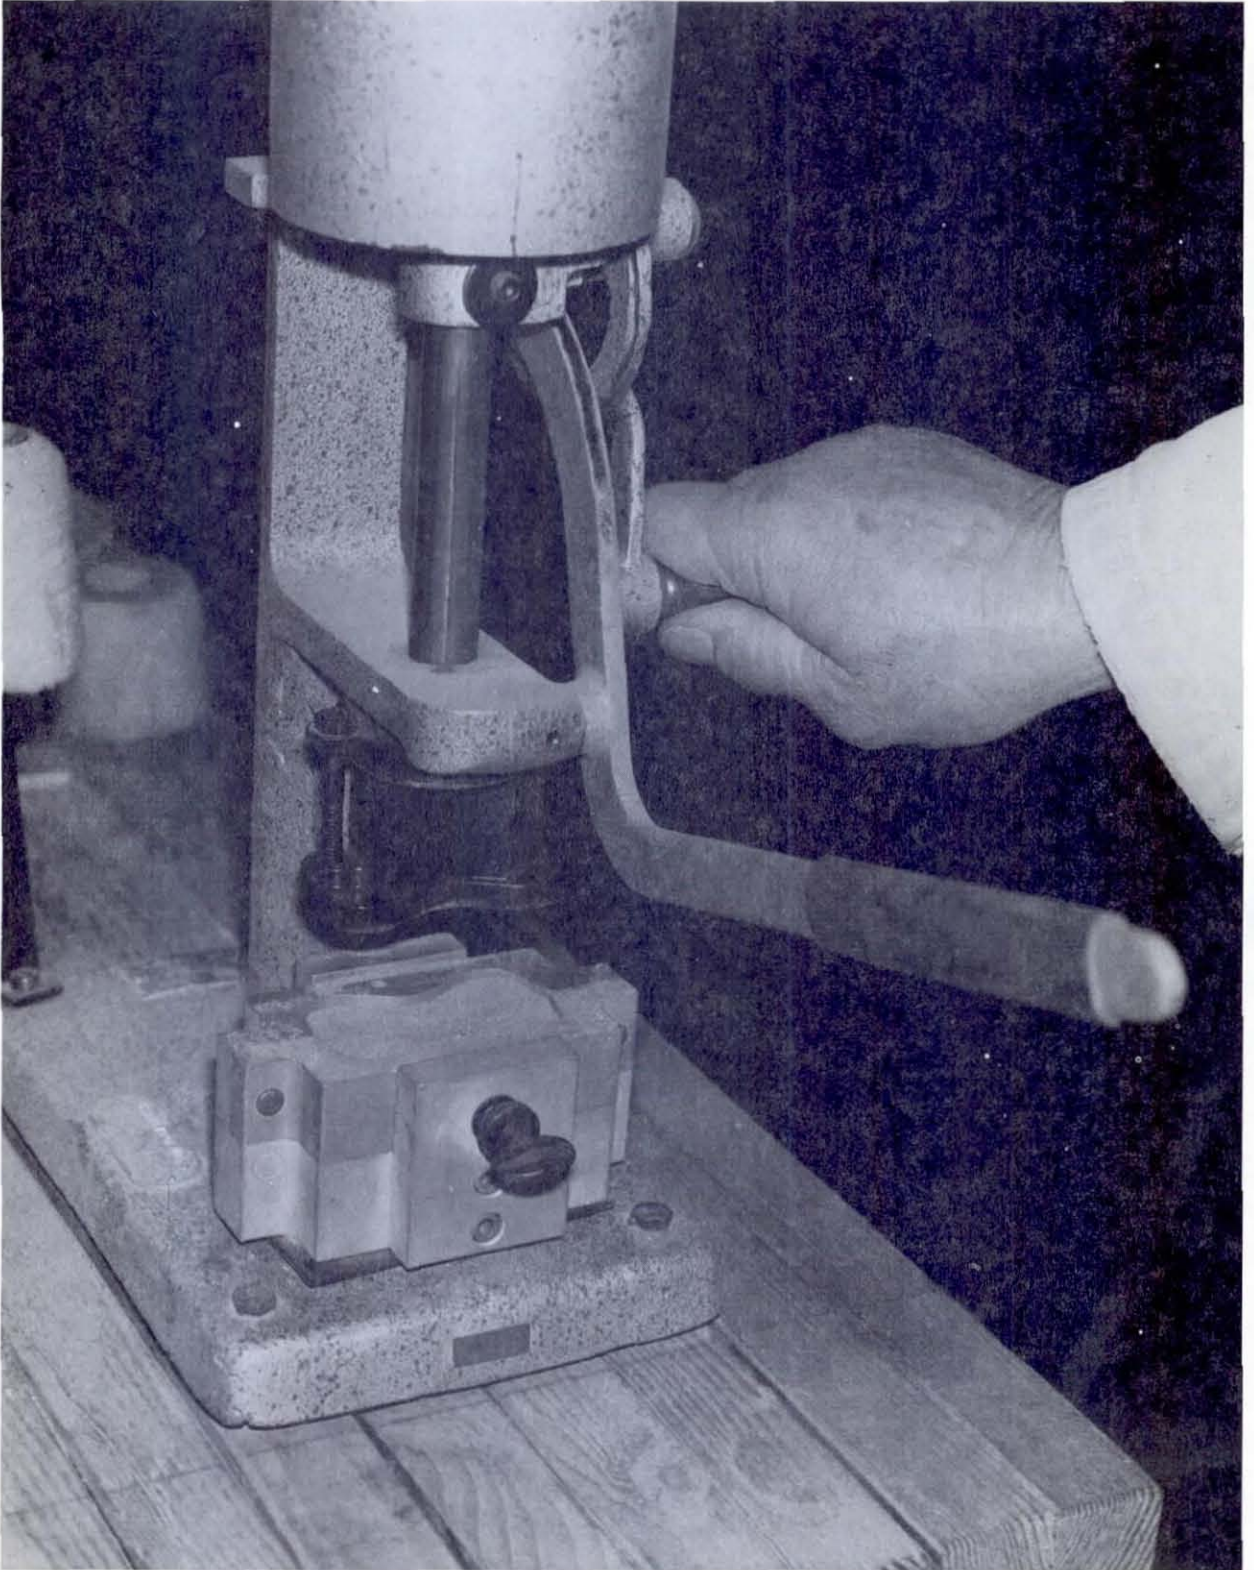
Briquet mold assembly and 14-lb rammer for preparation of rammed sand tensile specimens.
